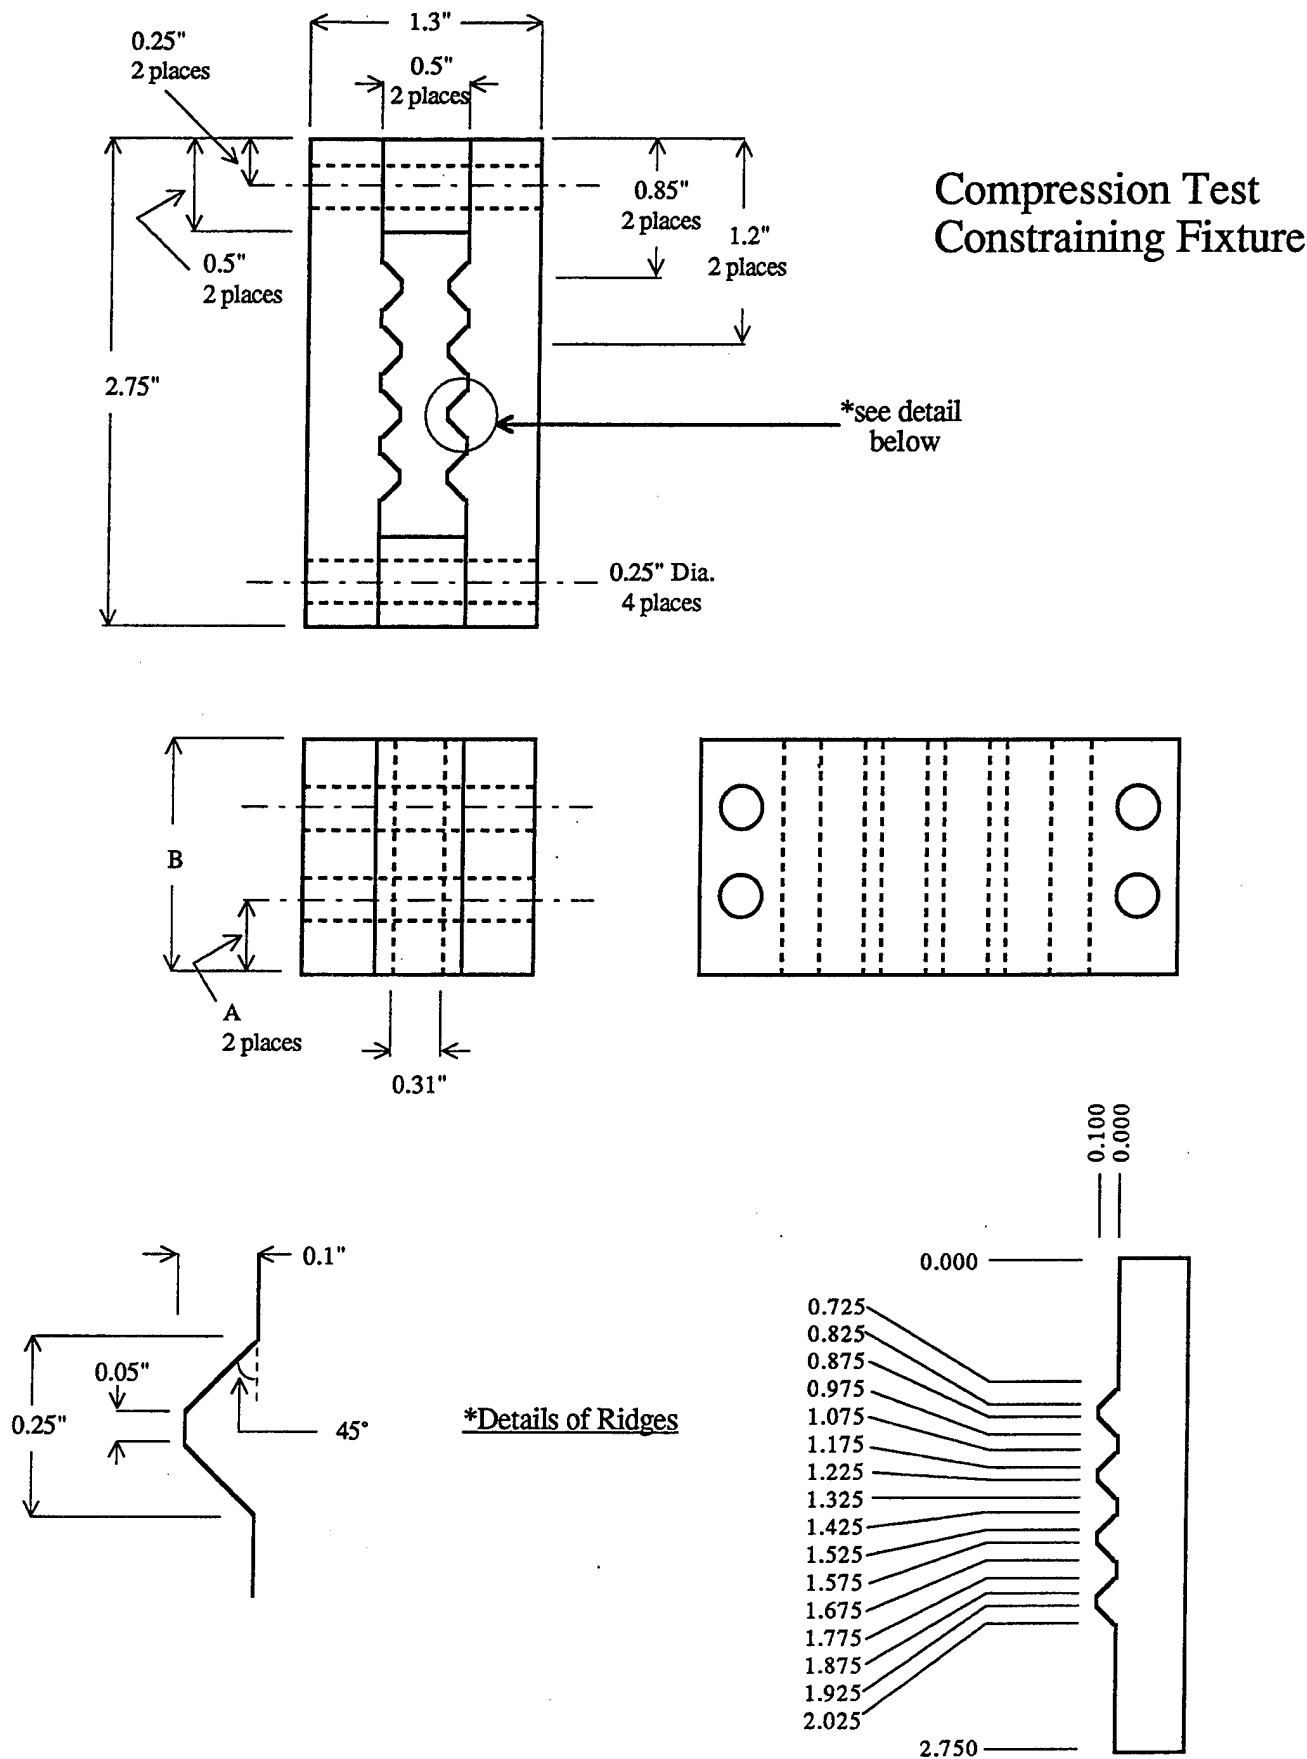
Drawing of the constraining fixture used to prevent specimen buckling during compression pre-straining of the blocks shown in Figure 2.
